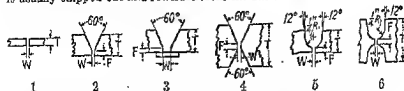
Proportions of Metal Arc Weld Grooves.
